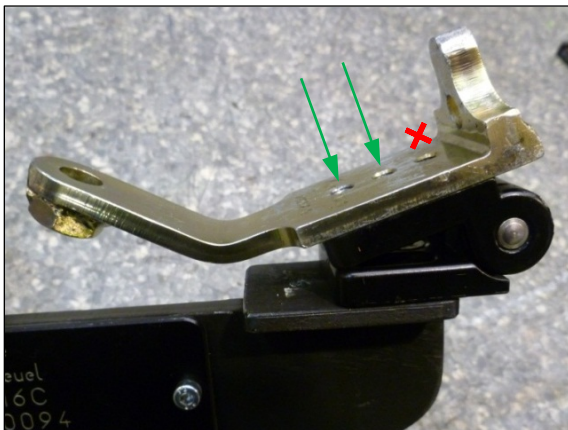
Fastening the new conrod support (NO SCREW at the position highlighted by the RED CROSS)
